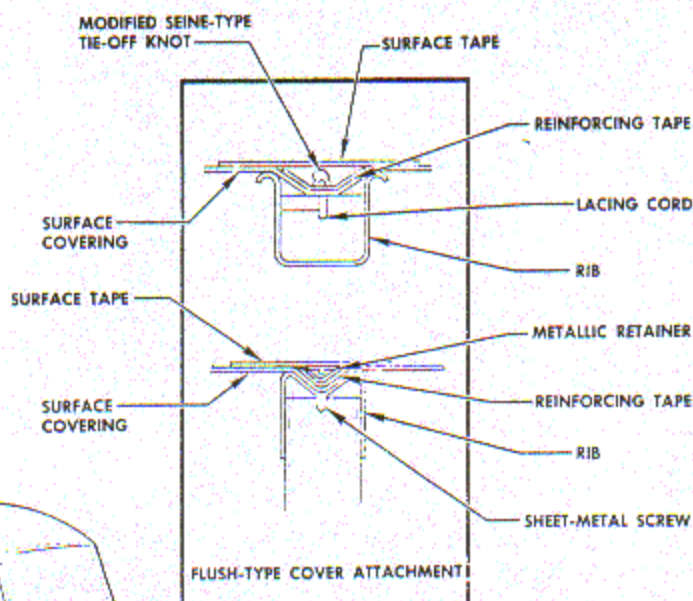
A — Alternate Method of Fabric-covering Control Surfaces
